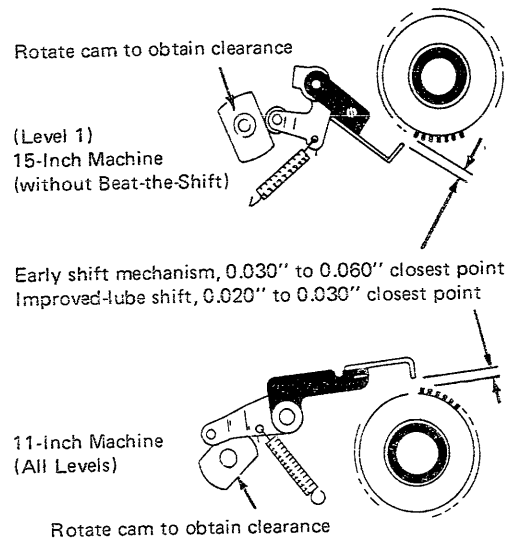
Shift-Interlock Cam (11-Inch Machines and Level 1 15-Inch Machines)
